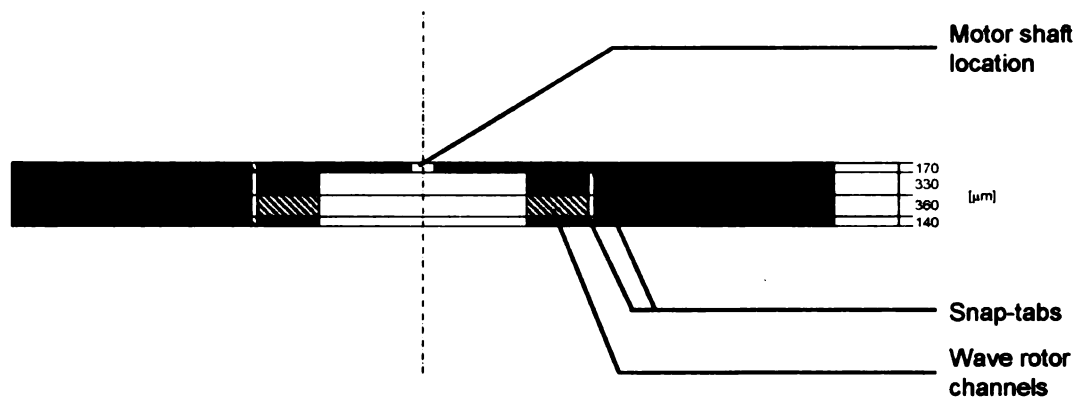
Cut-view of the rotor wafers' assembly.
